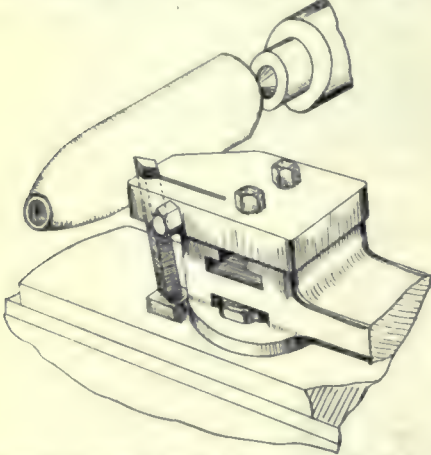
TOOL HOLDER USING SQUARE BITS ON END.
